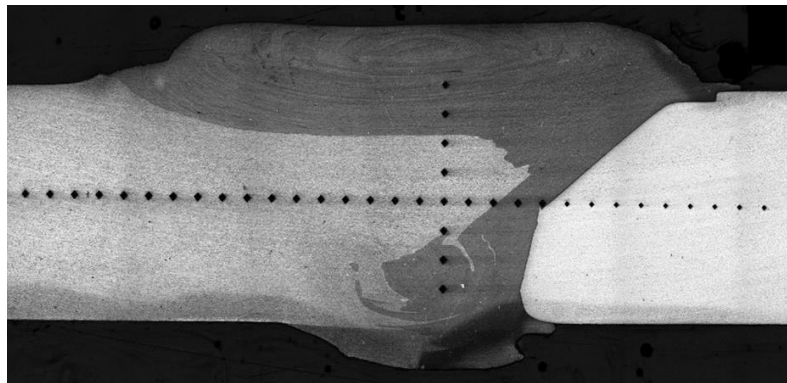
Detail of the welded zone. Only the Al part is etched.
